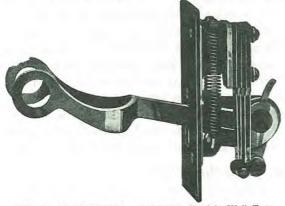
The MC-6241 Hookswitch as Used in Wall Type Telephones
